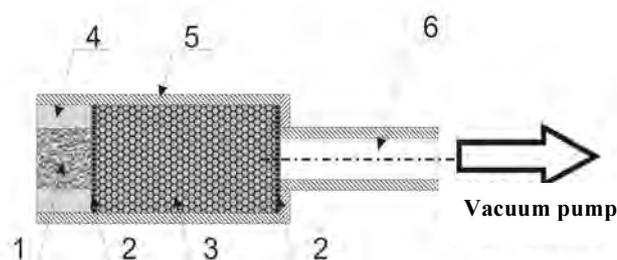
Design of sampler used for subpressure infiltration of ceramic preforms: 1 - preform sample, 2 - mesh, 3 - filter (cooler), 4 - sample (preform) sealant, 5 - casing, 6 - vacuum pump connection
